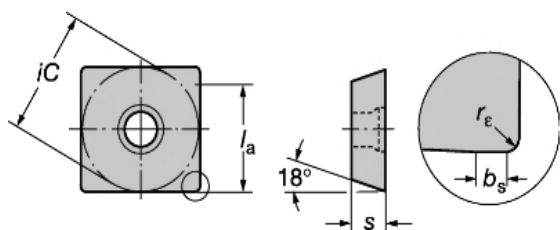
Tool insert geometry of square CBN – R290 12 T3 08 E CB50 from Sandvik Coromant
